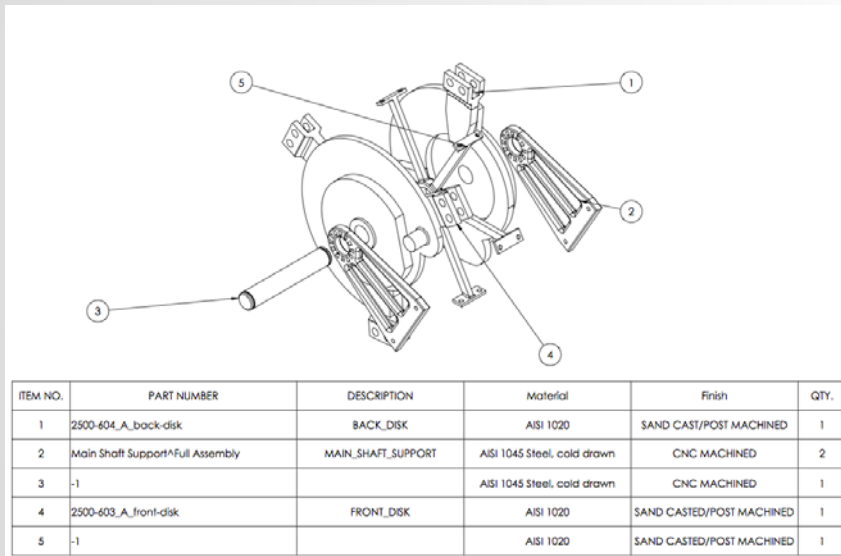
Detailed Drawing and Bill of Materials for Disc Subassembly
